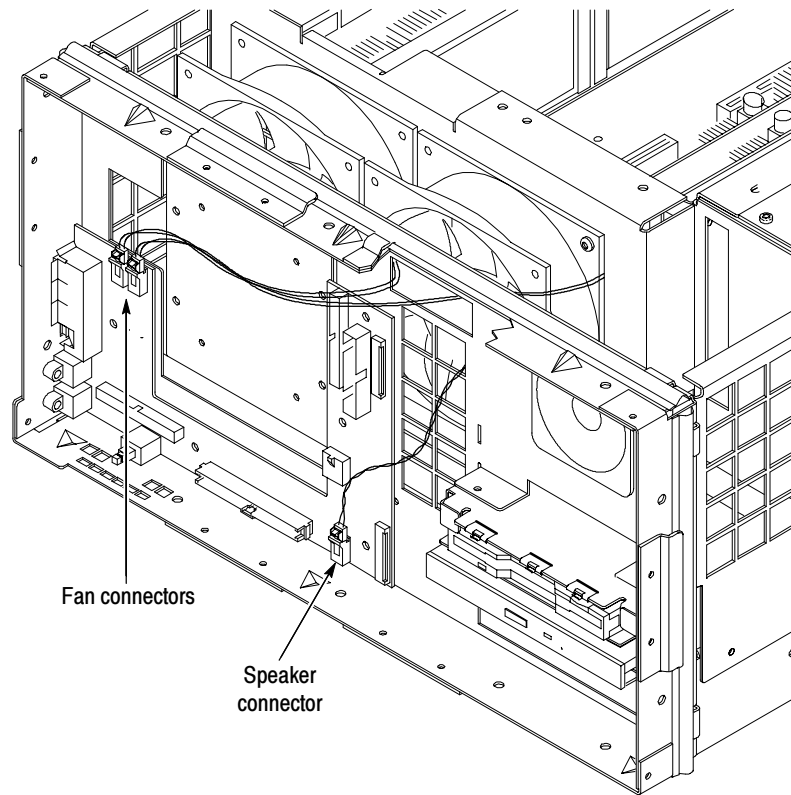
Cut-away view showing wire routing of fan and speaker wires
